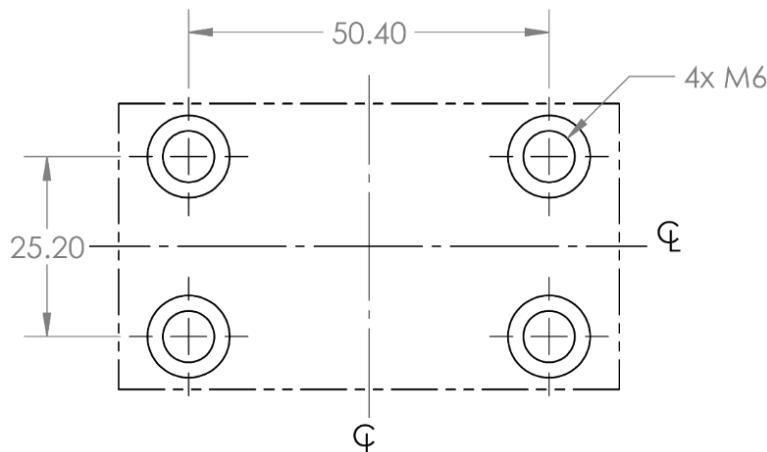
G. VT-21, Adapter Plate (P/N: 430107) Mounting Pattern for Optical Table
